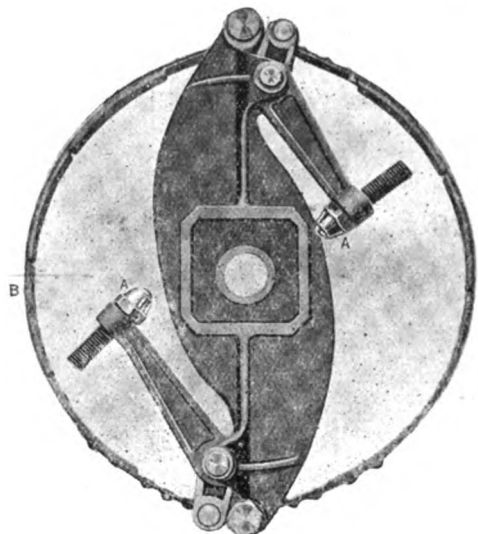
The Contracting Band of the Mors metal-to-metal Clutch.
